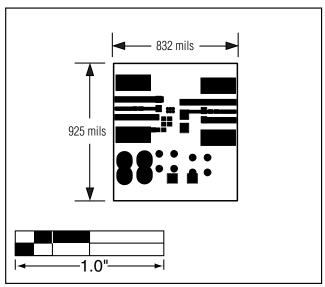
MAX2648 EV Kit PC Board Layout—Top Side Soldermask
